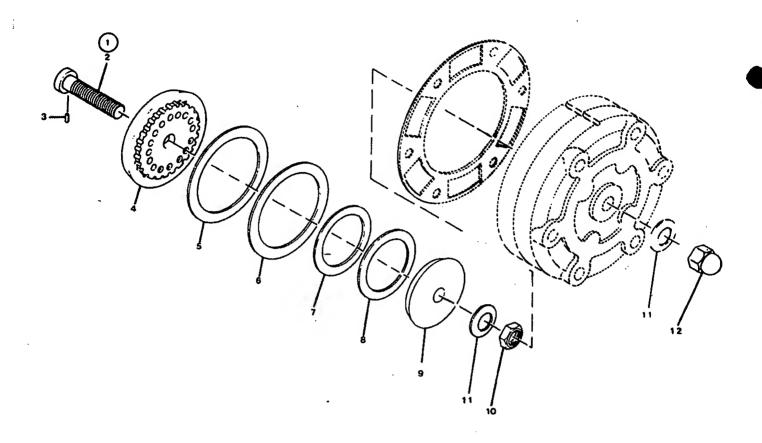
55 GA CONCENTRIC RING VALVE ASSEMBLY
